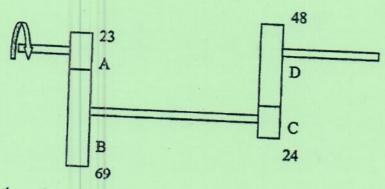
Engaged gears of a gear box when gear selection lever is at 1
